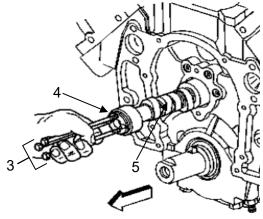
Install three (3) 8-1.25 x 100mm Bolts (3) in Camshaft front snout (4); use as handle to remove Camshaft (5)
